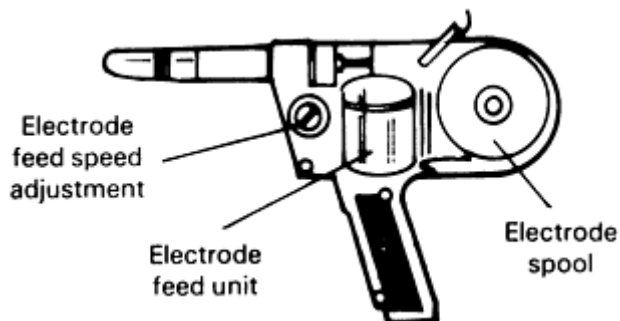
SPOOL-ON-GUN TYPE TORCH WITH COVER REMOVED TO SHOW SELF-CONTAINED PULL-TYPE FEED-UNIT SYSTEM
